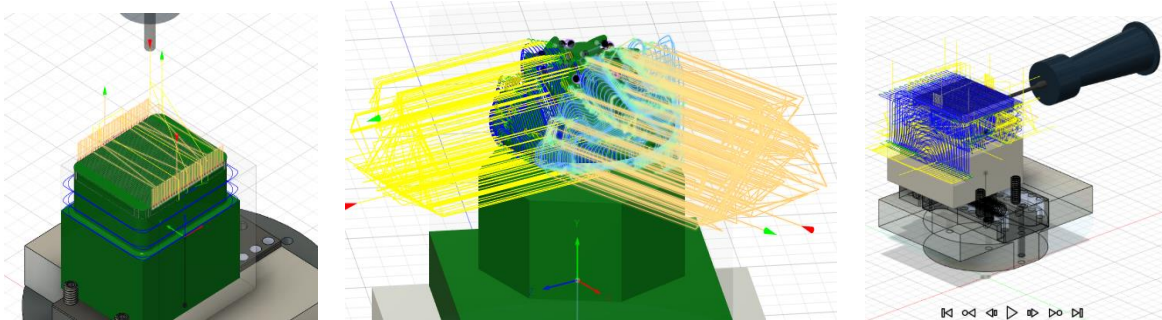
Fusion 360 CAM software simulating machining toolpaths for some example “3+2”-axis computer projects.
